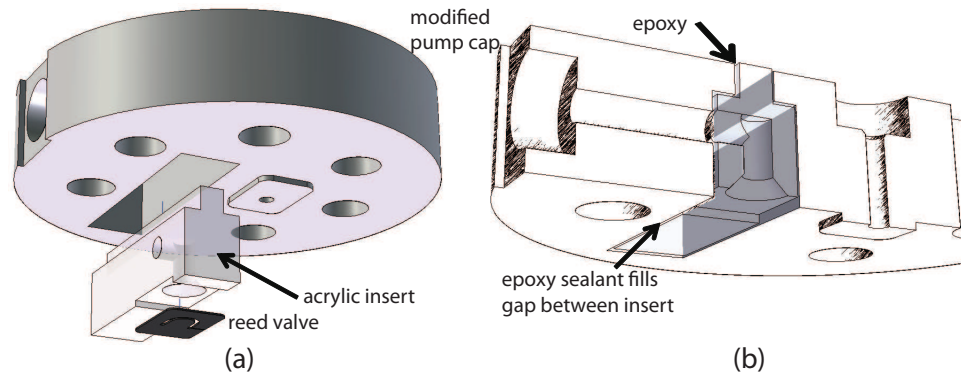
(a) Exploded 3D solid model of modified pump cap, acrylic insert, and outlet reed valve. (b) Cutaway 3D model of assembled modified pump cap and insert. Epoxy is used to seal the gap between the insert and the pocket of the pump cap.
